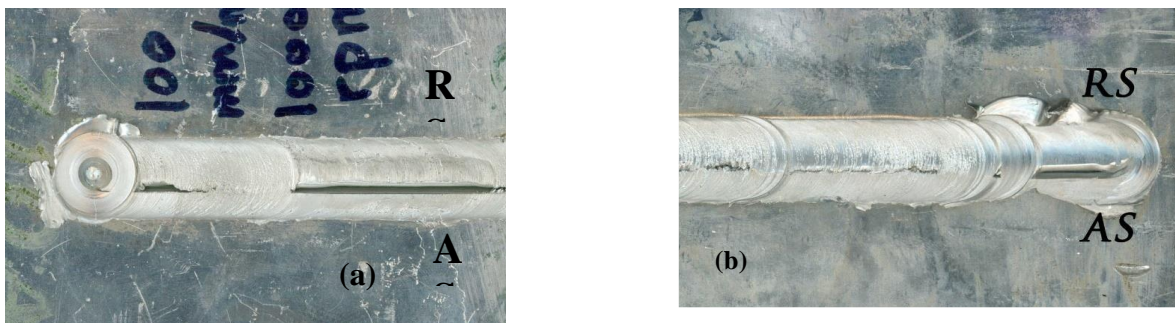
Two welded T-joint at the same welding conditions rotational rate 1000 rpm with traverse speed 100 mm/min but with two different tools. (a) using the 1st tool (D/d) =3.36; (b) using the 2nd tool (D/d) =3.28
